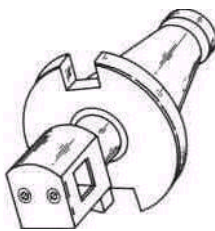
A fly-cutter adapter used with a single-point cutting tool.
